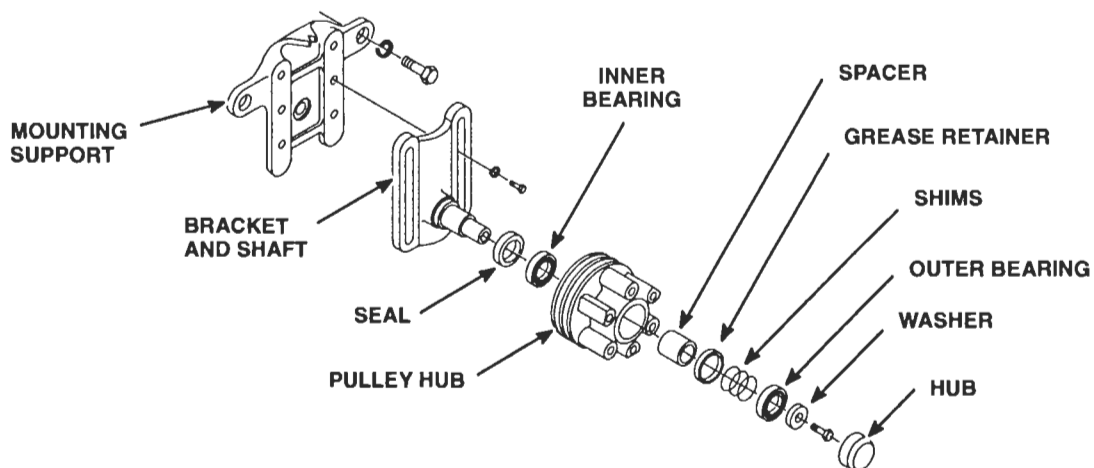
Shaft Type Fan Hub Assembly for Compact Front Engine
